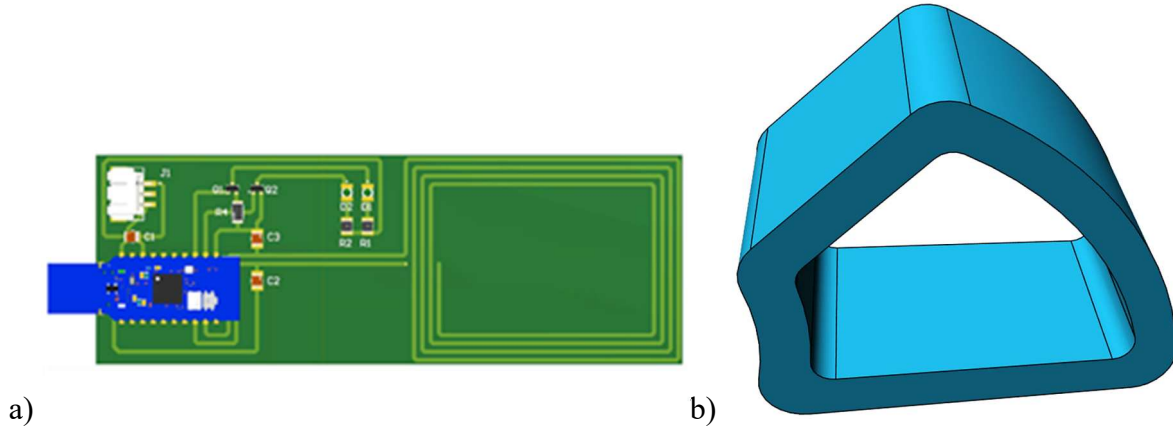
a) 2D design of the NFC reader hybrid PCB including SMD components and b) 3D structural element of the card reader used as printing substrate.
